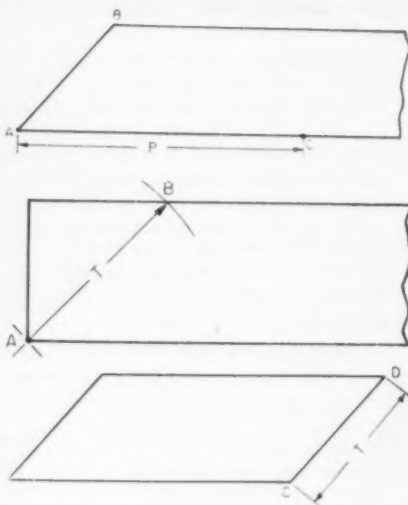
Calculated factors T and P are used for layout on the abrasive sheet to give proper cutting marks. Make cuts from rear of sheet to save wear on knife.
